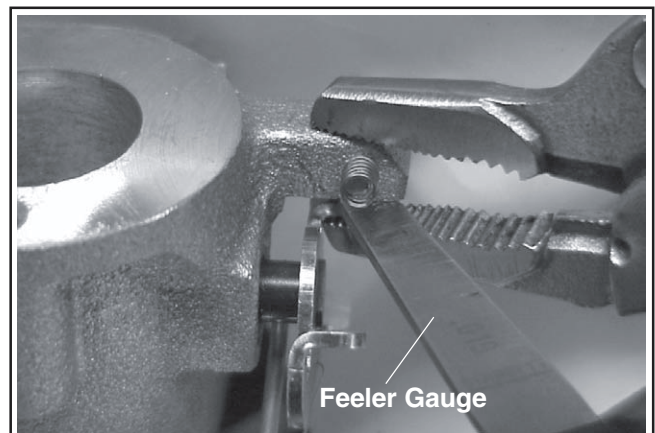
B-35. Inserting Feeler Gauge (Engines Without Stop Screw).
